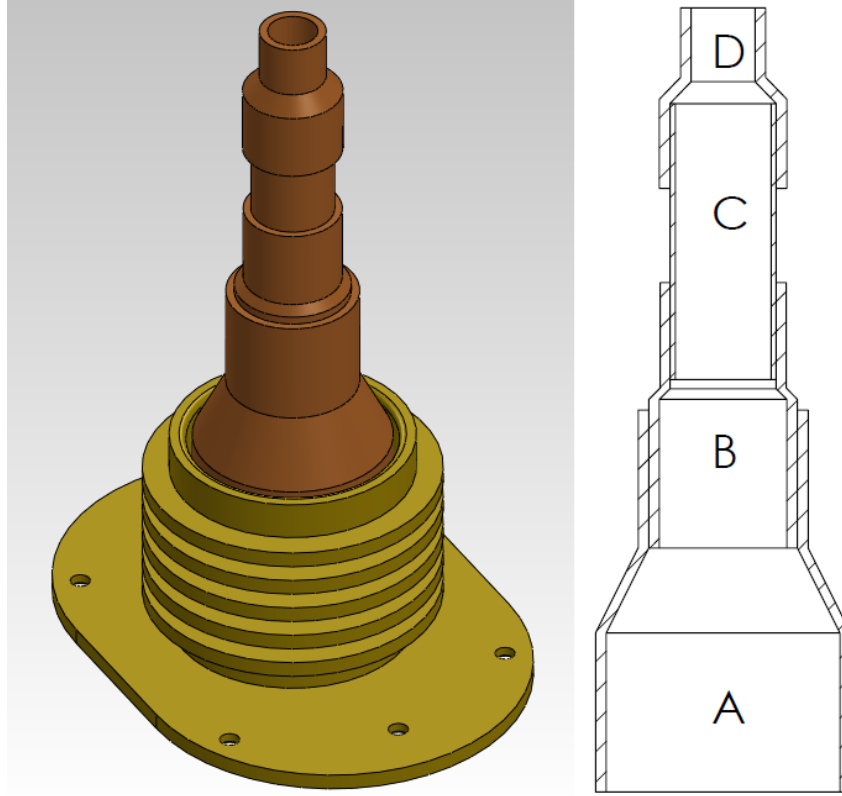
Second iteration nozzle assembly. On the left is the flange housing with the complete nozzle, the right shows how the nozzle is broken down into components.
